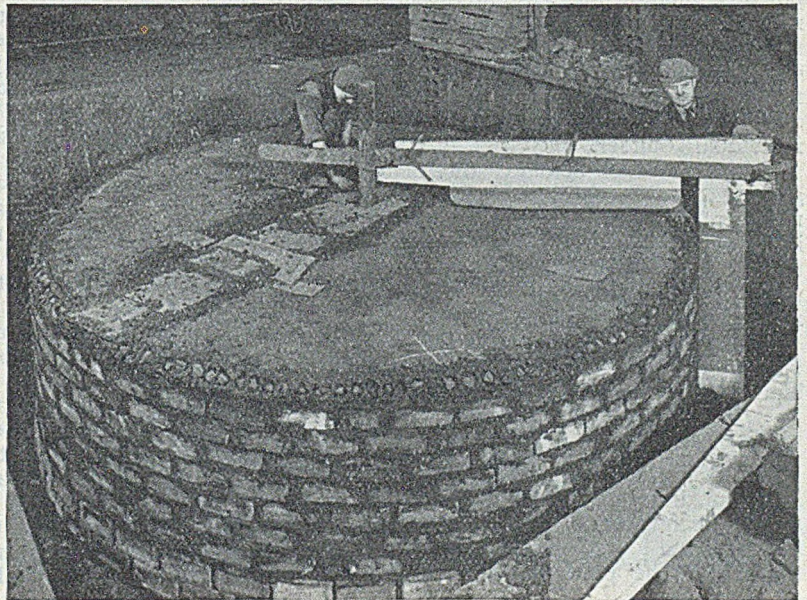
Building the Dummy Pattern for an 18-ton Gear-wheel Centre; this Method takes up Less Floor Space than a Fully-strickled Mould.
